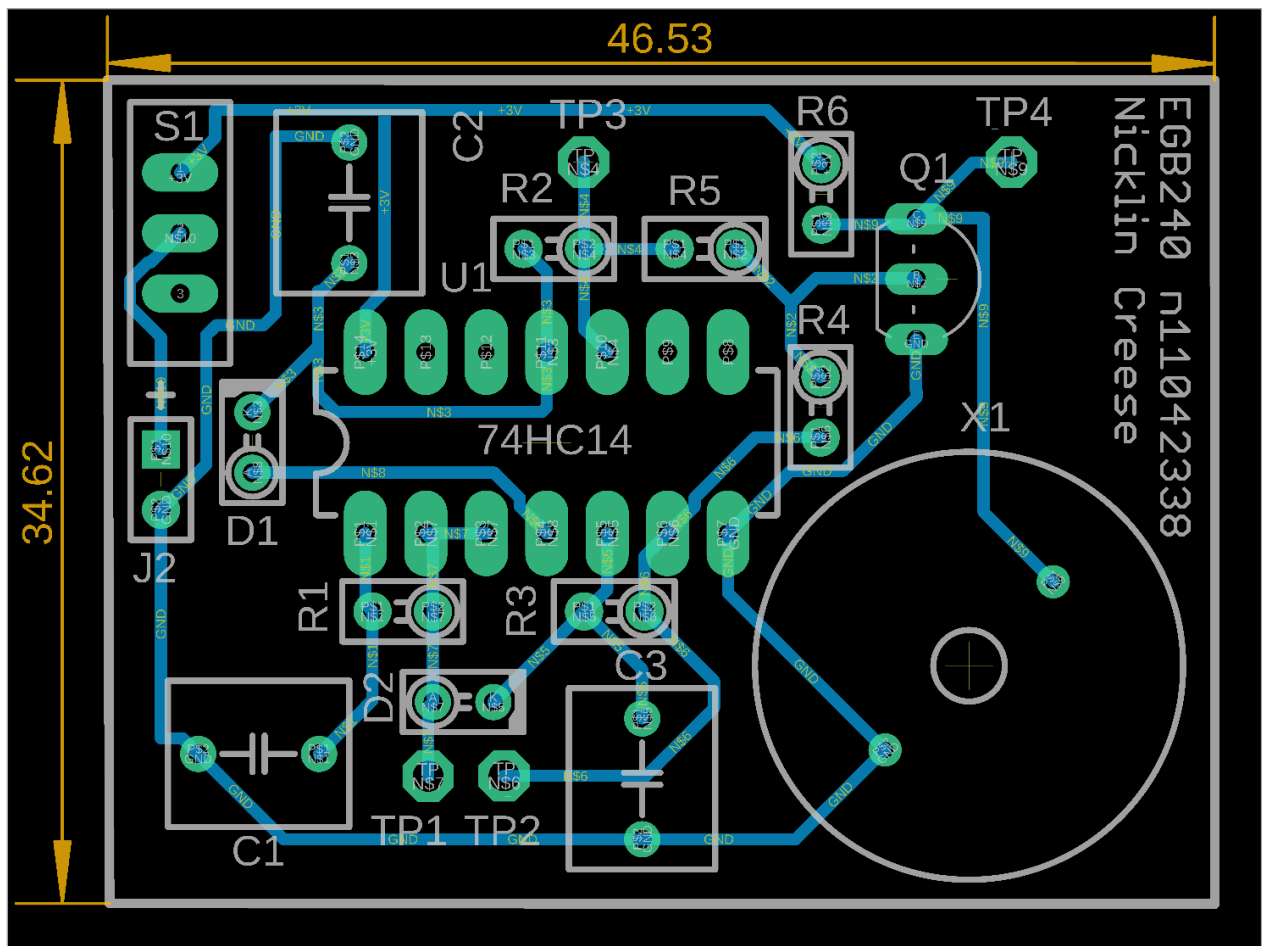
PCB design layout for the circuit (Width of 46.53mm, Height of 34.62mm)
